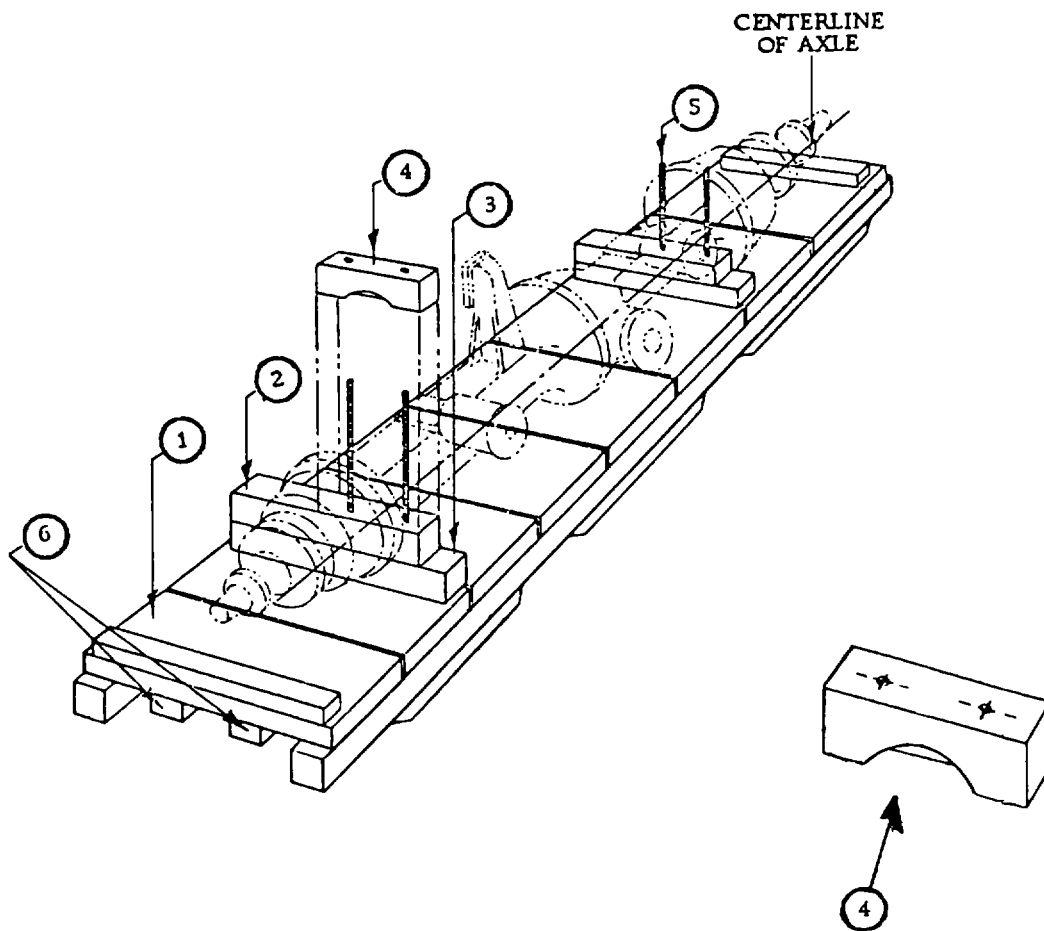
Loading, Blocking, Bracing, and Anchoring Typical Axle Assemblies.
